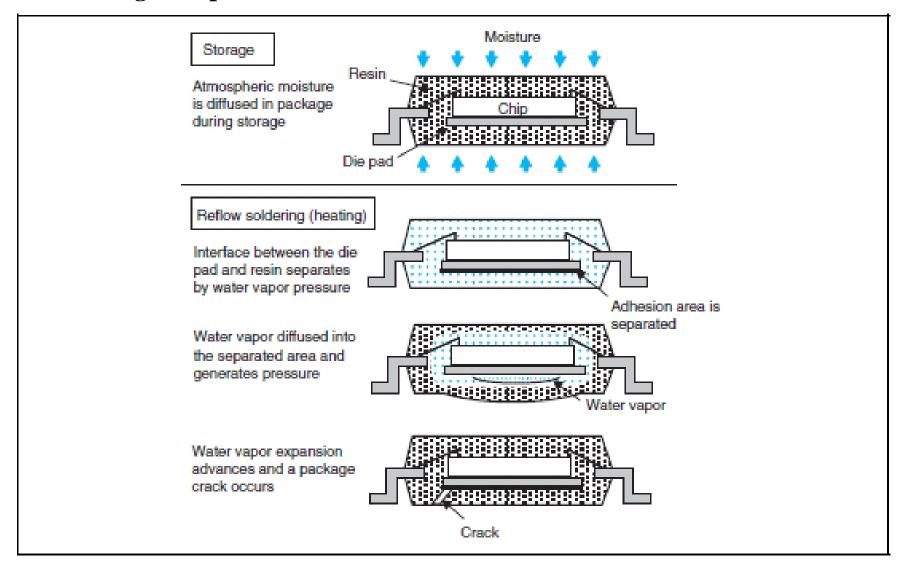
Model of Crack Generation in Reflow Soldering [54]
